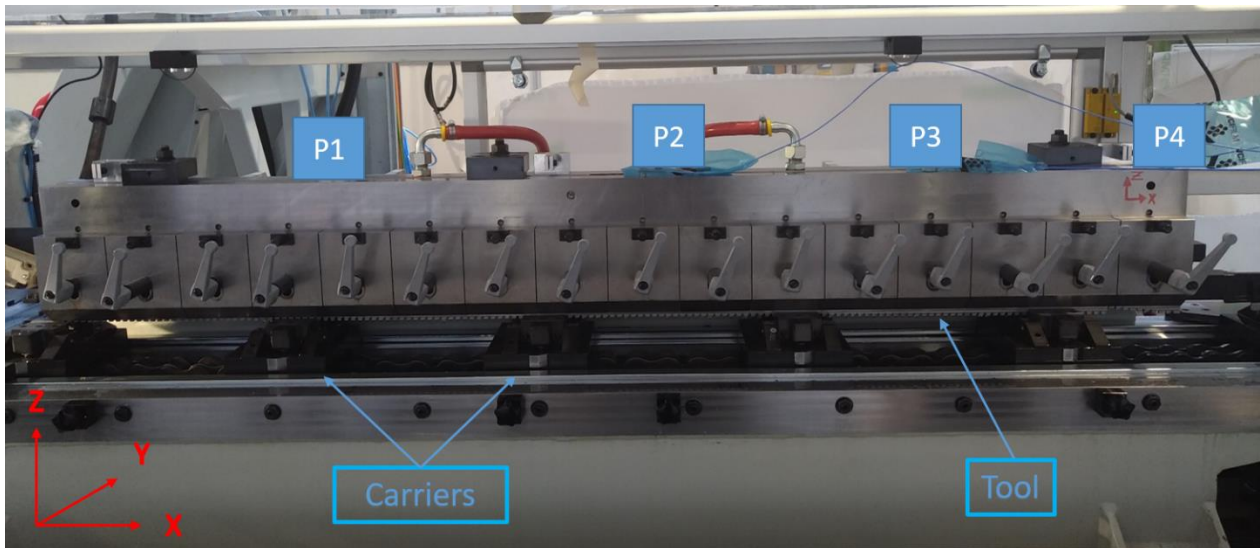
Machine front view and sensors locations ( $P_1 - P_4$ ).
